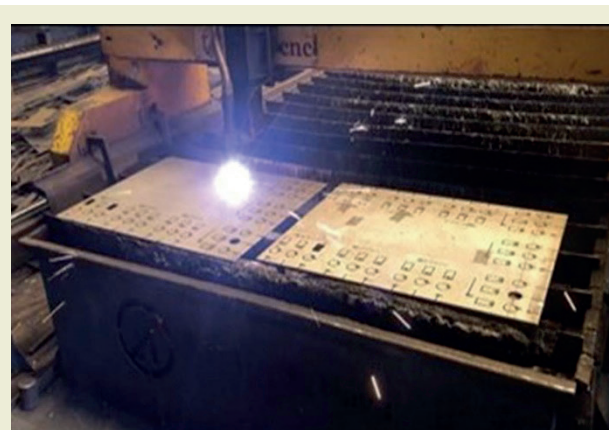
AJAN brand PAC machine (during cutting of AISI304 sheets with thicknesses of 4 and 8 mm) [49]
